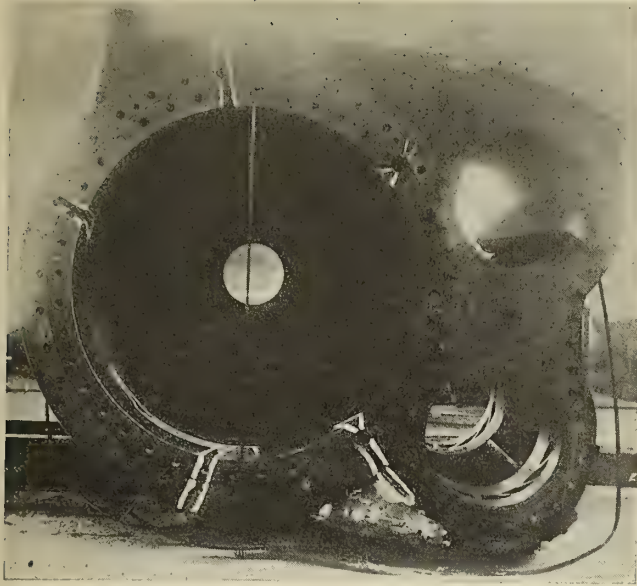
Wrecked Low-Pressure Cylinder, Showing Cracks V-Grooved by Chipping Preparatory to Welding. The Seven Cracks, All at Head End, Ranged from 1 to 8 Feet in Length and $2\frac{1}{4}$ to $3\frac{3}{8}$ Inches in Depth
